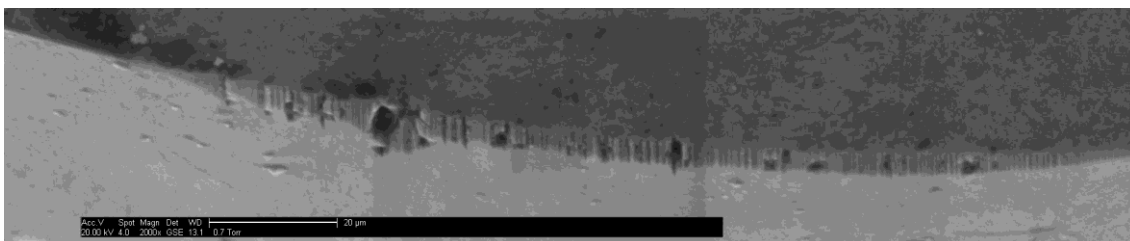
MCC tool (S83778) after cutting distance of 12.8Km and onset of brittle failure.
